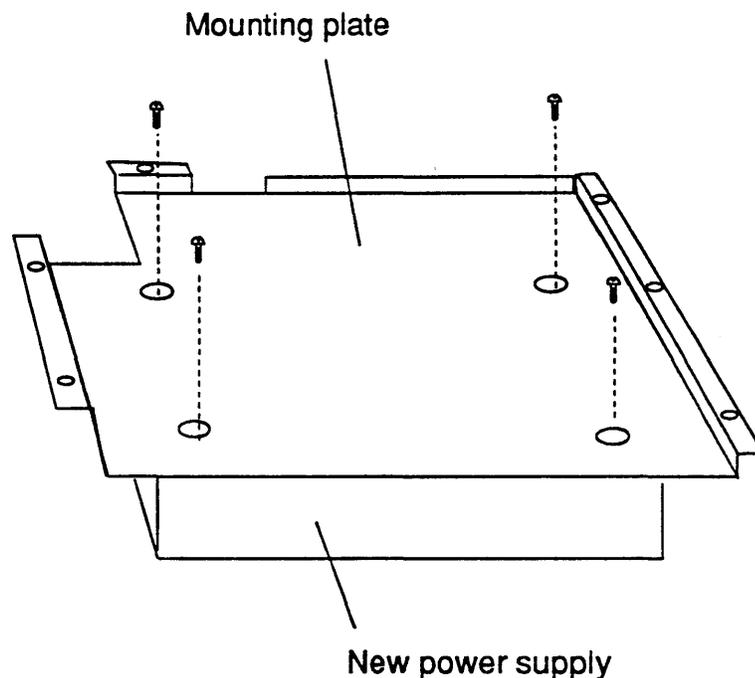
Attaching the Mounting Plate to the Power Supply Chassis
